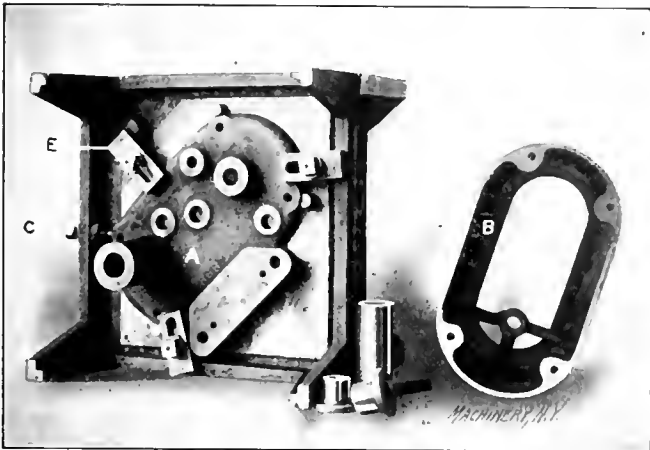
Drill Jig shown in Fig. 75 with Work in Place.
